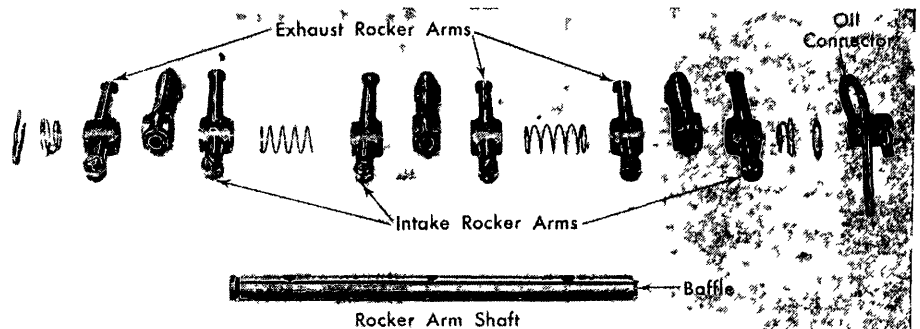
Layout of rear rocker arm and shaft parts. 1941-52
